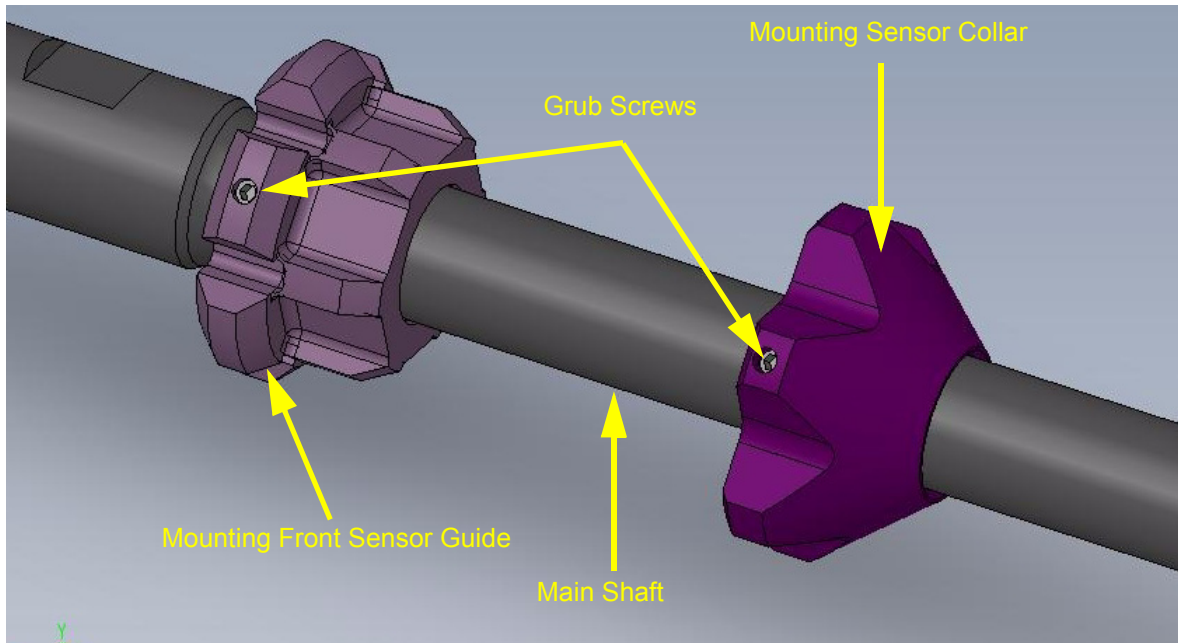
Fitting the Mounting Front Sensor Guide and Mounting Sensor Collar onto Main Shaft
